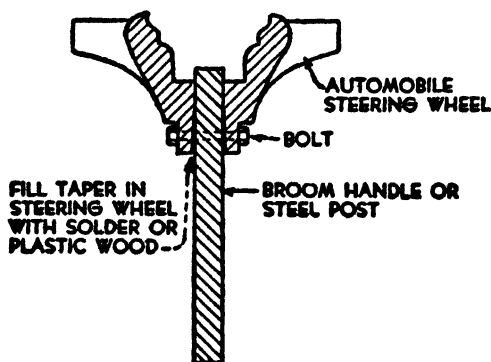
POST FOR MOUNTING AUTOMOBILE STEERING WHEEL
